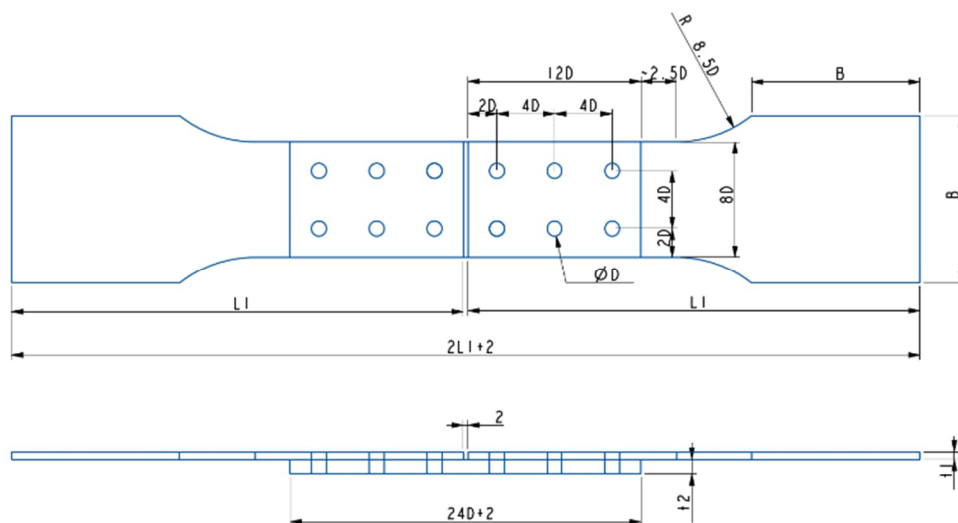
Specimen drawing, with bolts removed for visibility.
